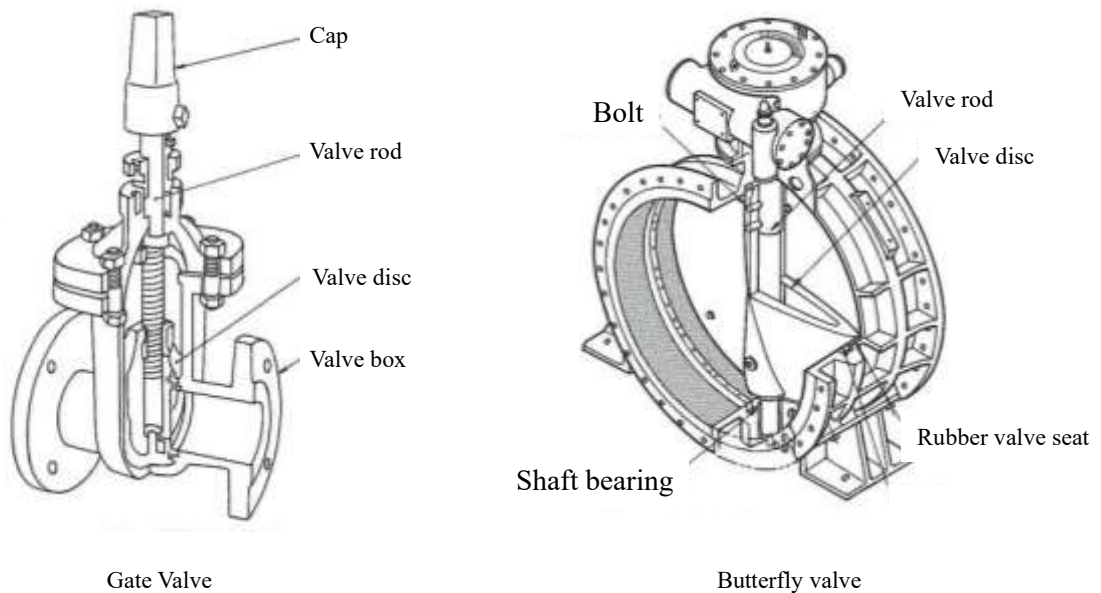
Structure of Gate Valve and Butterfly Valve
